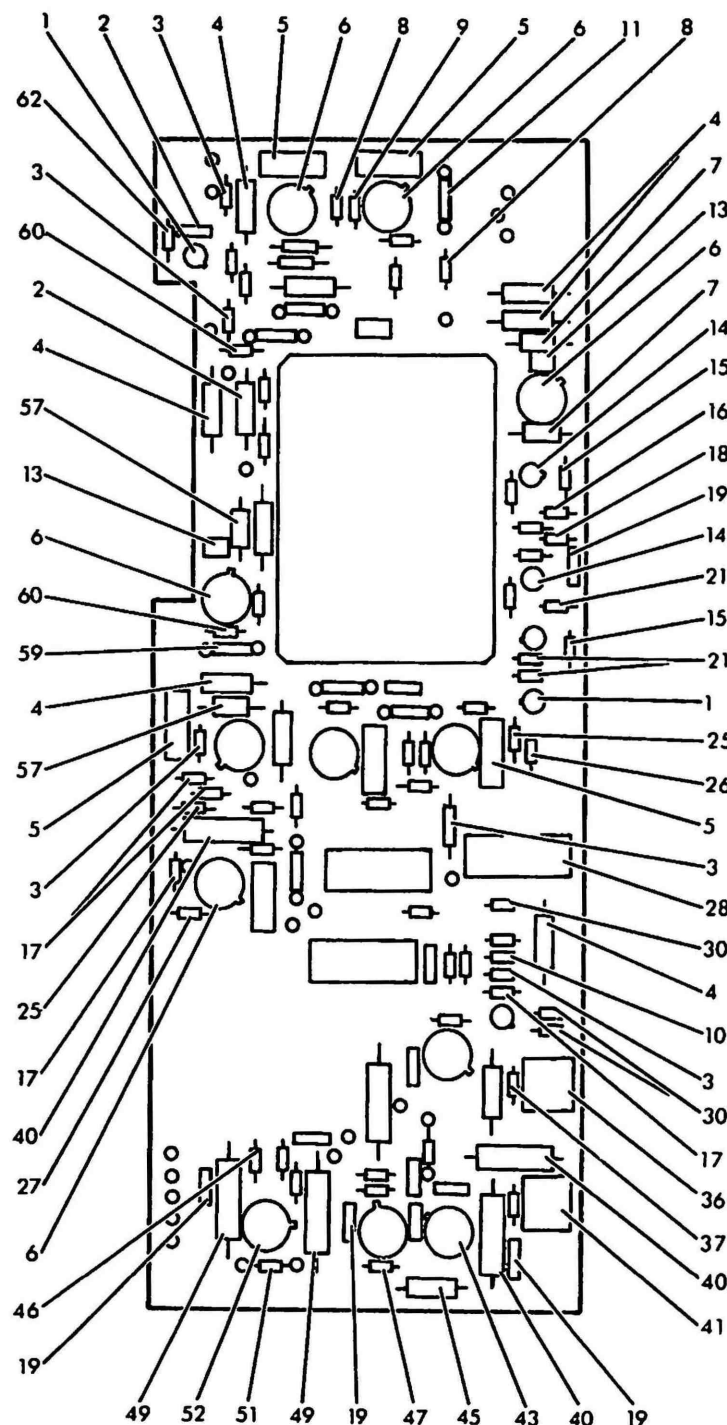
1 MHz, 3 MHz Generator Board Assembly (Sheet 2 of 2)
